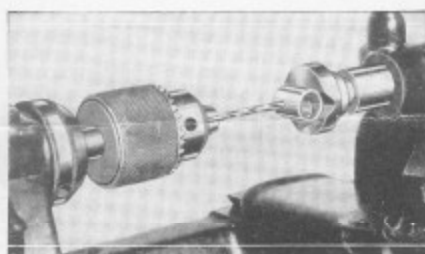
Drilling Round Work using Crotch Center in Tailstock of Lathe.
